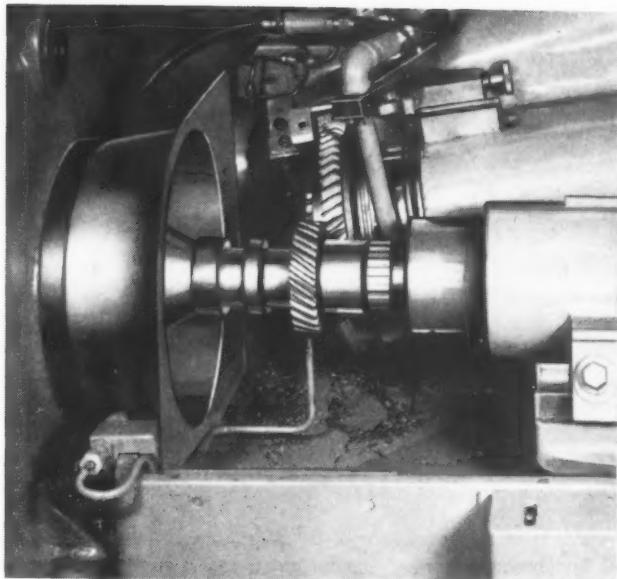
Close-up view showing set-up for finishing an external helical gear on machine illustrated in Fig. 1
